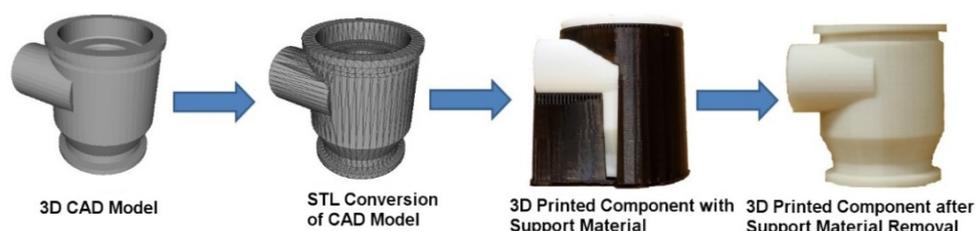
3-D printing process: From CAD model (left) to printed component (right)
